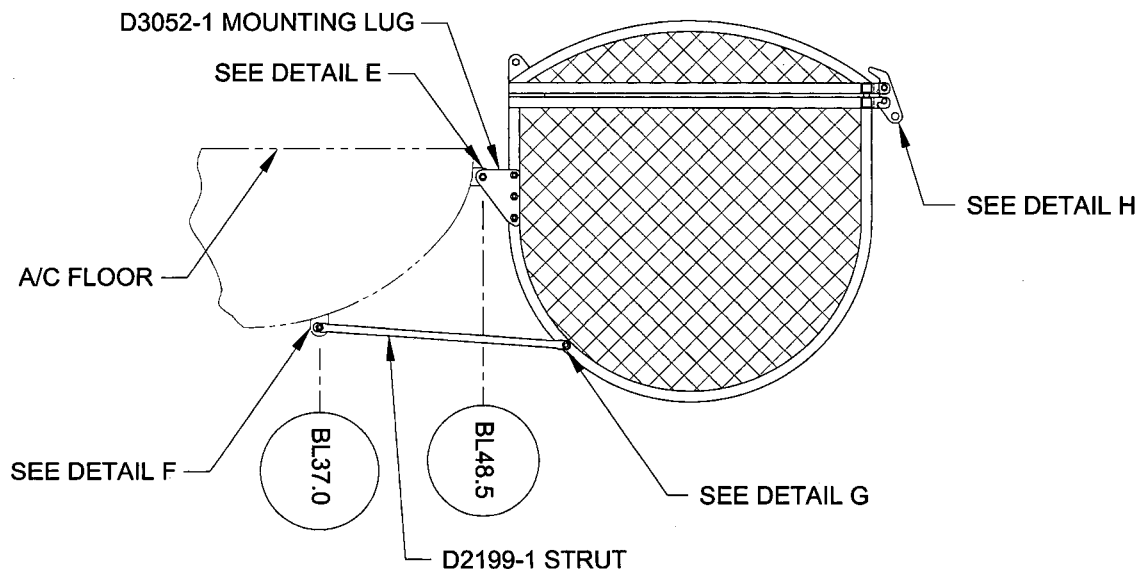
Section A-A Looking Fwd at STA 84.29
